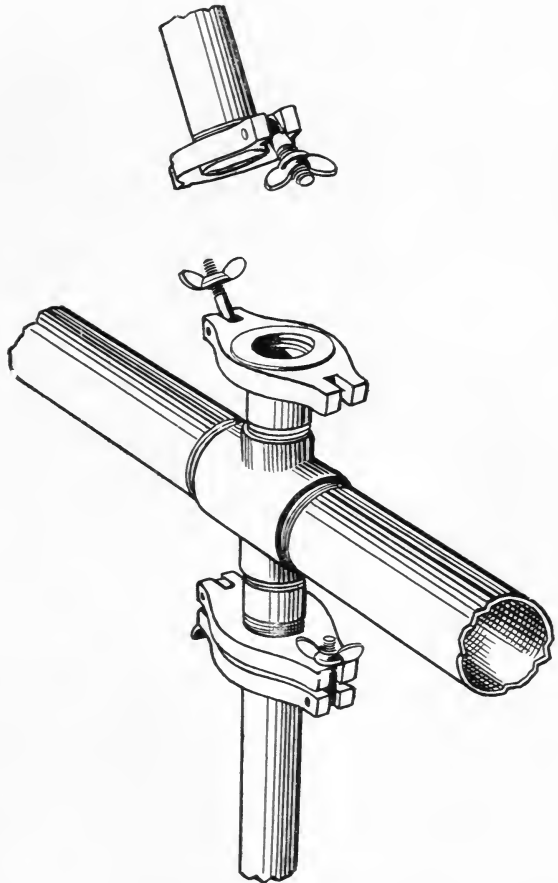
Movable Pipe System. Quick Coupling Flanged Joint (Heavy Pipe).
